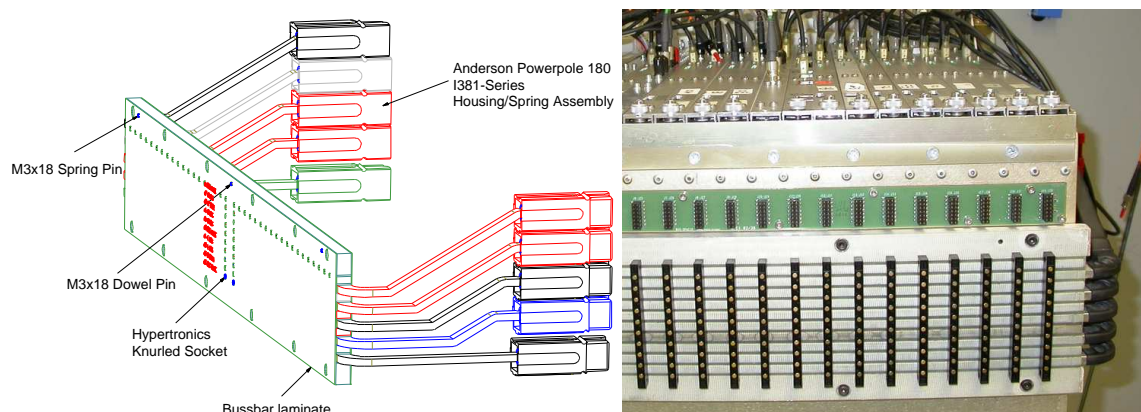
Assembly drawing (left) of a power bussbar and photograph (right) of a bussbar installed on a FEC. The (black) power combs can be seen inserted through the bussbar. The (green) SPAC bus can also be seen, mounted above the power bussbar.
